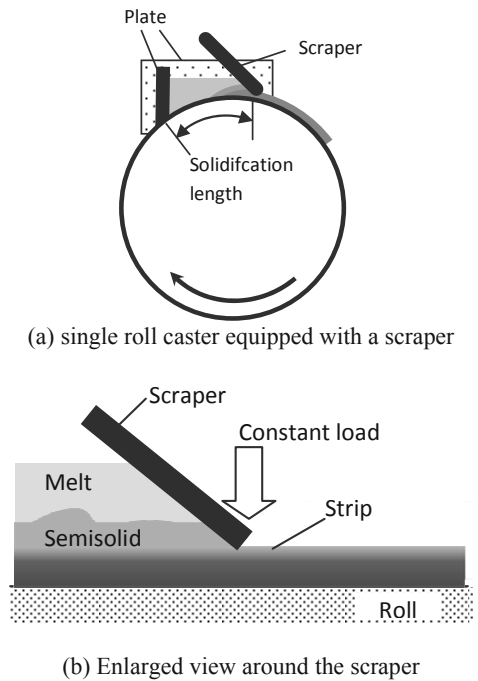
Schematic illustration showing a single roll caster equipped with a scraper
